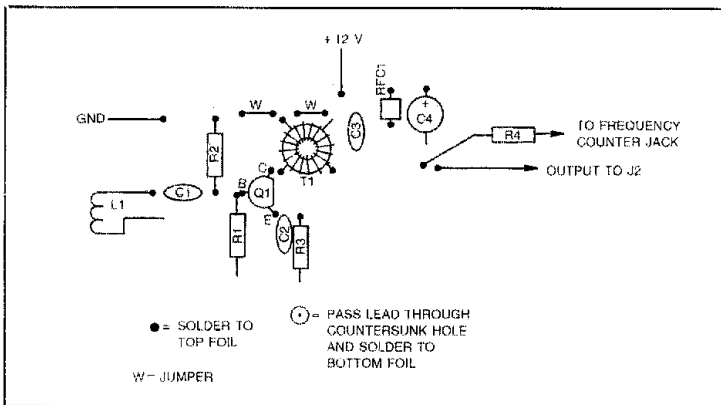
Parts-placement guide for the dipper amplifier. Parts are placed on the saw-cut side of the board.
